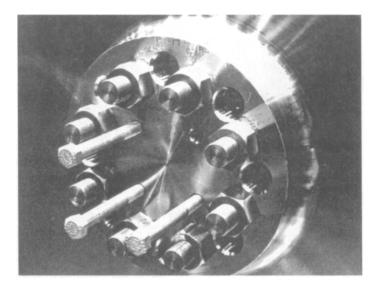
The disk containing the rotating blades is attached to the end of the shaft by means of eight studs with nuts. Disk-to-shaft juncture is an axial-face (curvic) spline, allowing transmission of torque and concentricity of the disk under high temperature conditions.
